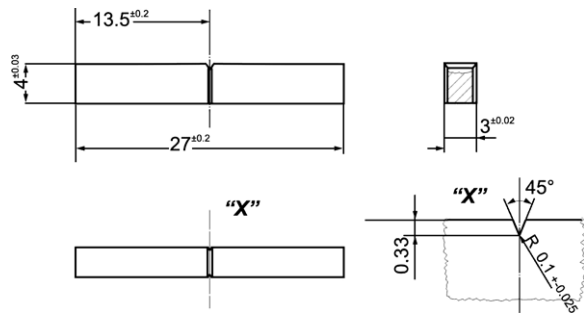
Subsized fracture-mechanics specimen (side-grooved). $W = 4$ mm, $B = 3$ mm, a (crack length) = 1 mm.
